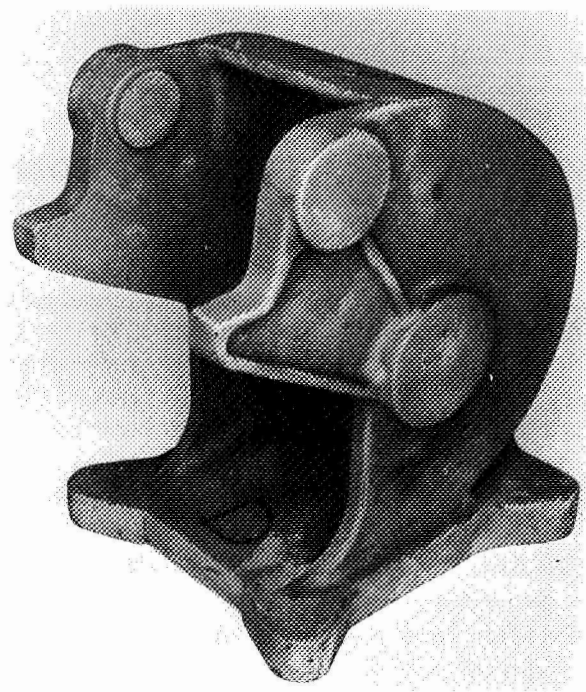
Separation mechanism housing cast with M-45 alloy weighs 8 pounds; 6×9×10 inches OD.
